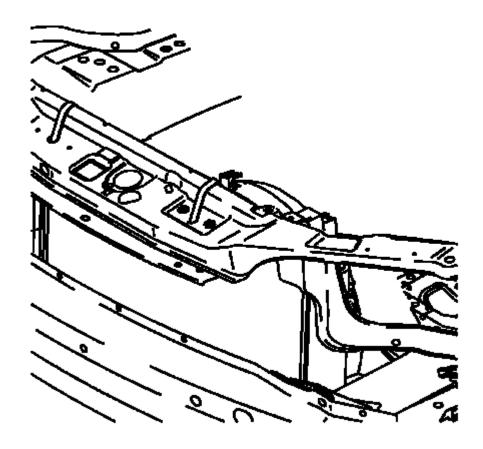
Securing Radiator/Condenser/Fan Assembly Courtesy of GENERAL MOTORS COMPANY
